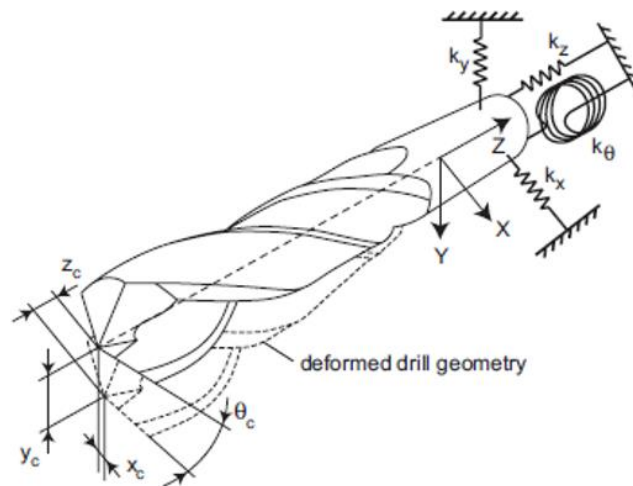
Deformed drill geometry (Altintas, Manufacturing Automation: Metal Cutting Mechanics, Machine Tool Vibrations, and CNC Design, 2012)
